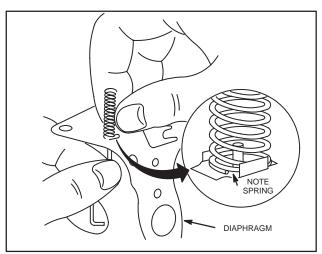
ASSEMBLING SPRING TO DIAPHRAGM
